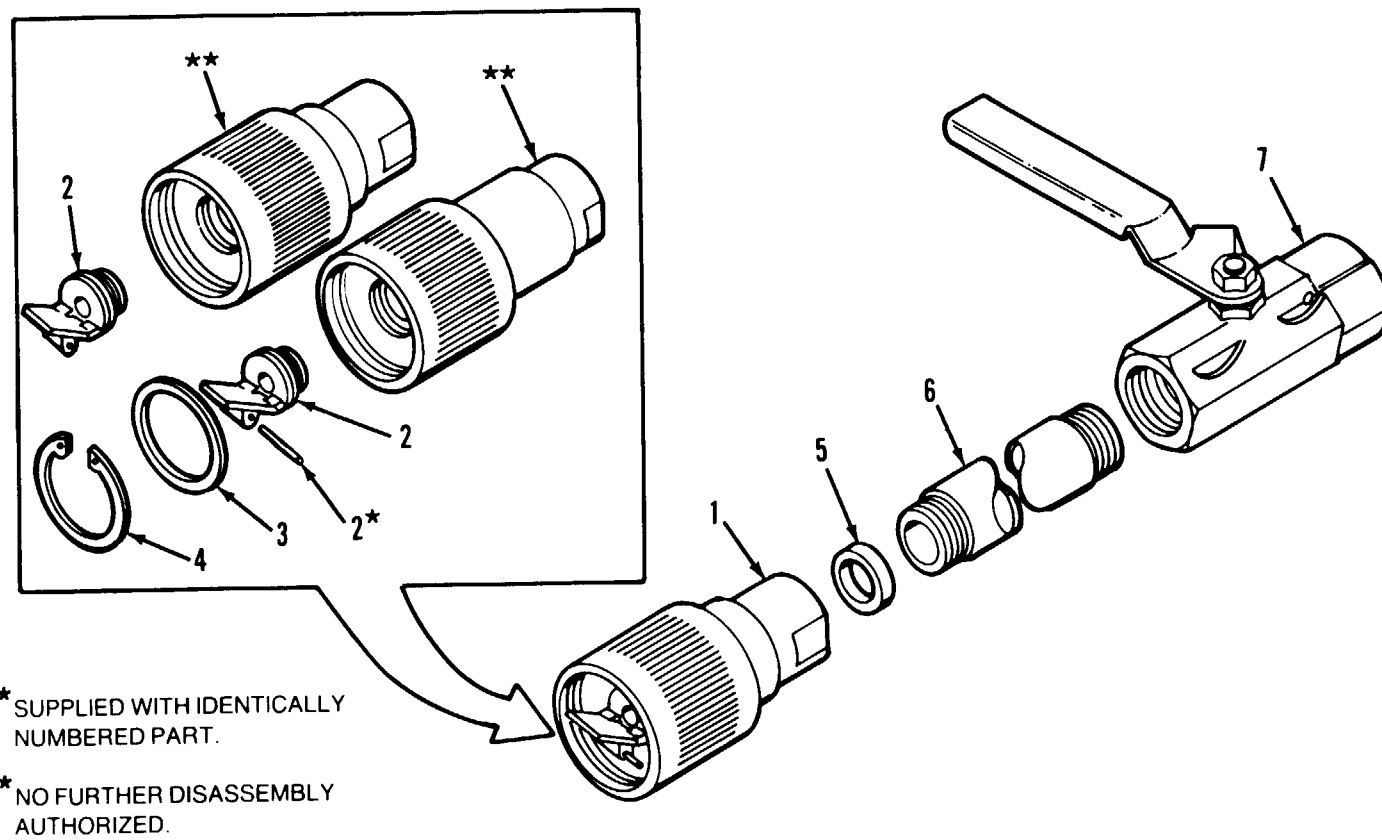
Gun Assembly and Slurry Nozzle Assembly.
